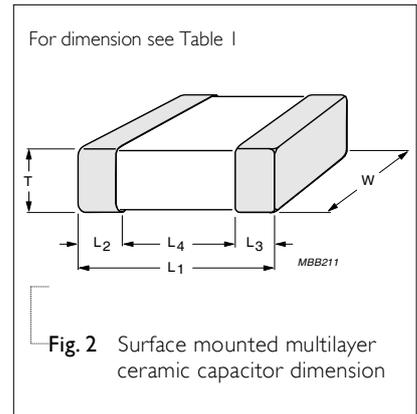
Surface mounted multilayer ceramic capacitor dimension
